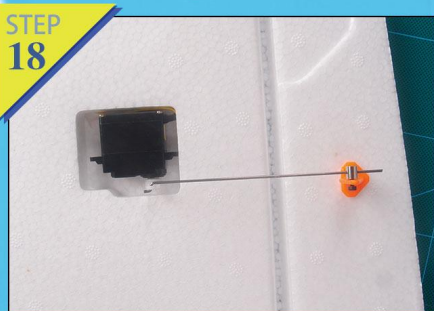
Install quick assemble parts between wings and cross over wires of aileron's servo (Pay attention to align carbon fiber tube hole of wings with quick assemble connector.). Install pulling rod and servos and cut off redundant parts.
